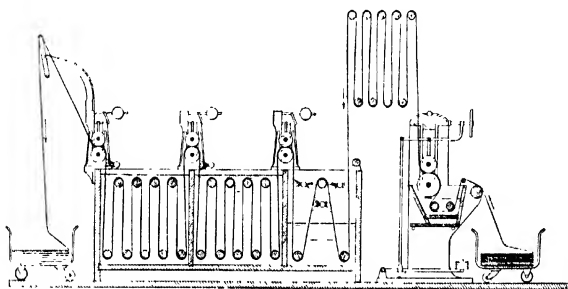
Machine for Developing Para-Red on Piecegoods
